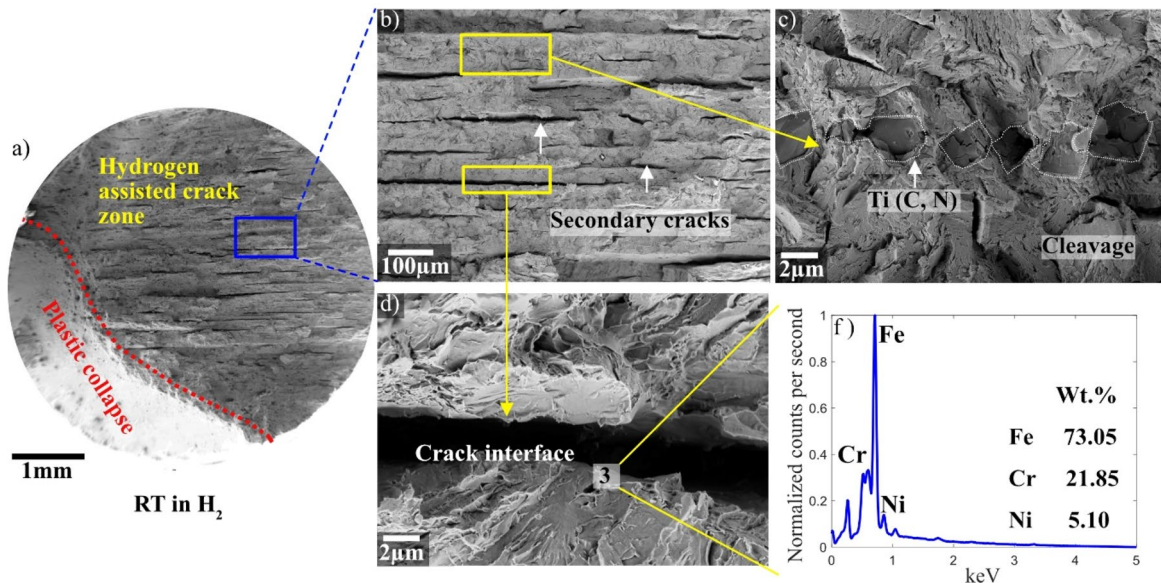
Fracture surface in H_2 at room temperature; (a) overall fracture surface (b) secondary cracking; (c) magnified view of region in (b), showing cleavage around Ti(C,N); (d) and (e) magnified view of crack interface and EDX point analysis of crack in (d).
